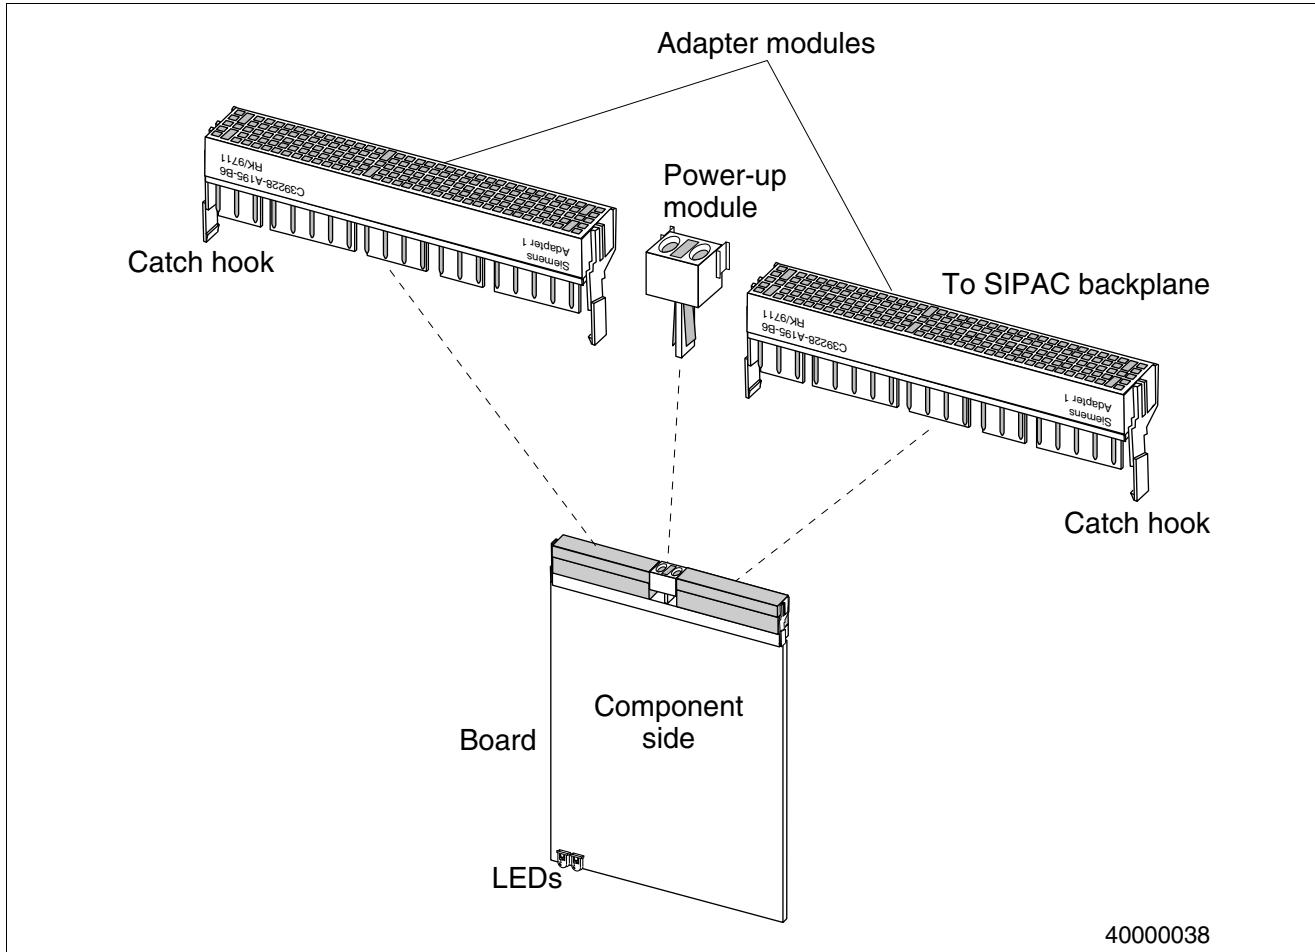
SIVAPAC to SIPAC Board Adapter 1
